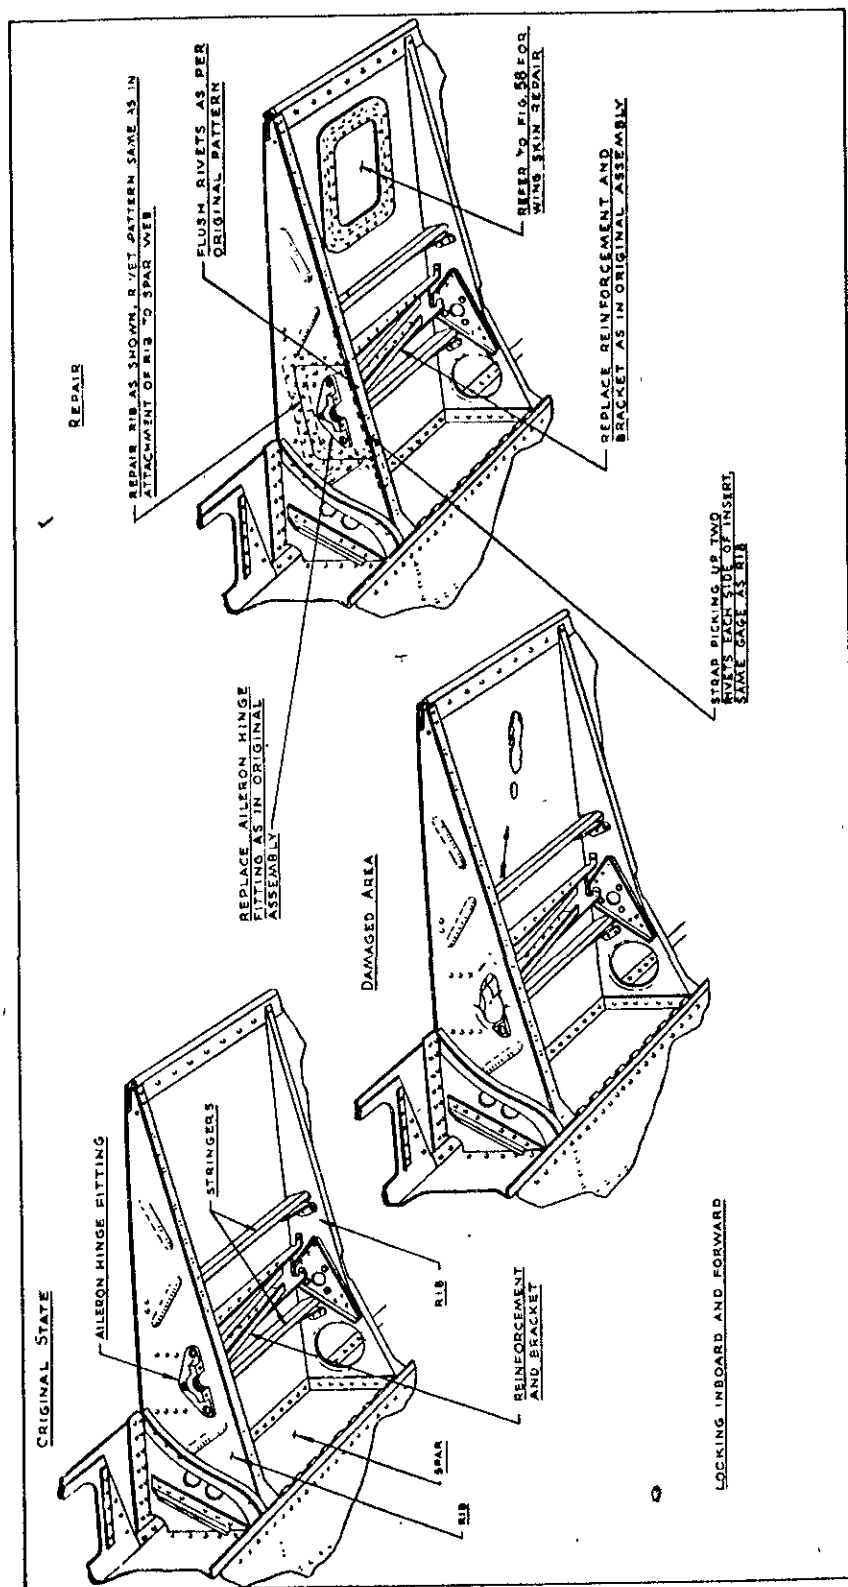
Aileron - Rib and Fitting - Sta No. 122
